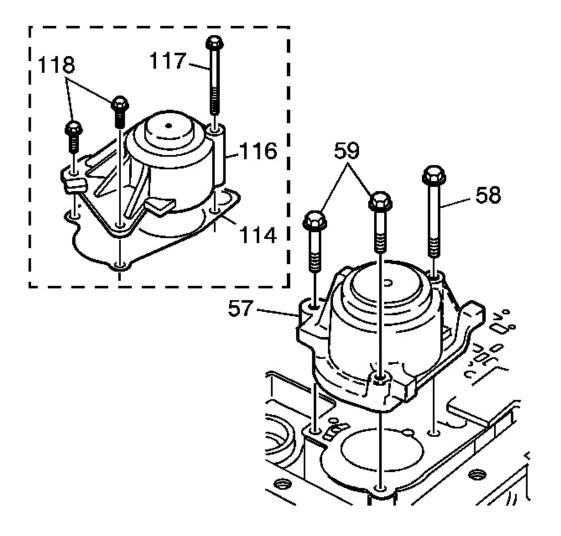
View Of 1-2 Accumulator Housing & Bolts Courtesy of GENERAL MOTORS CORP.
